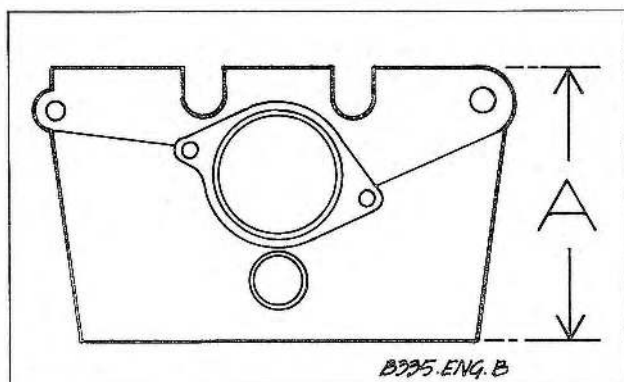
Front view of cylinder head showing minimum resurfacing dimension (A). 6-cylinder engine shown.
